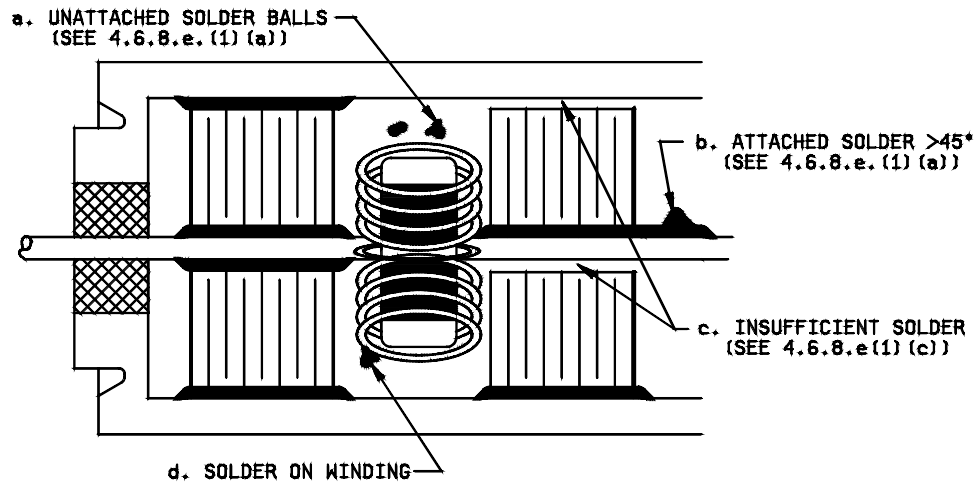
Typical π filter construction and examples of unacceptable filter workmanship.
